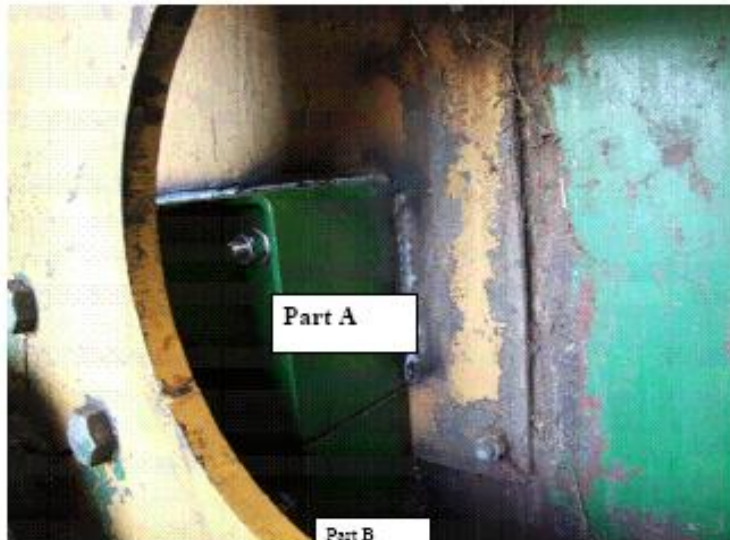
shows top of retainer welded into position on rotor window and assembly bolts tightened up
